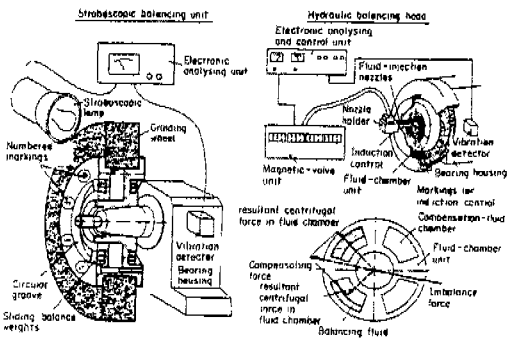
Stroboscopic balancing unit and hydraulic balancing head
